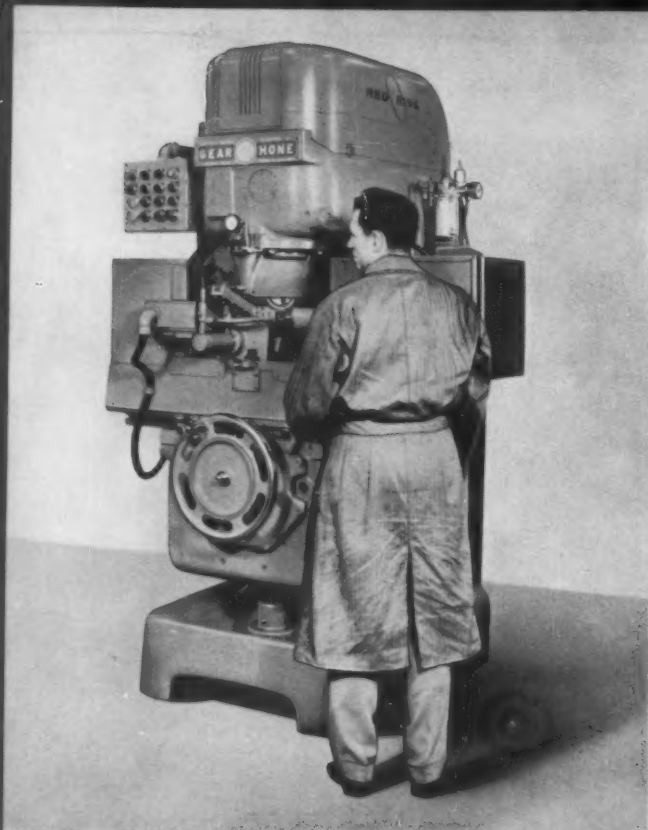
This gear honing machine is equipped for entirely automatic operation. The rocker type loader is air-operated.
